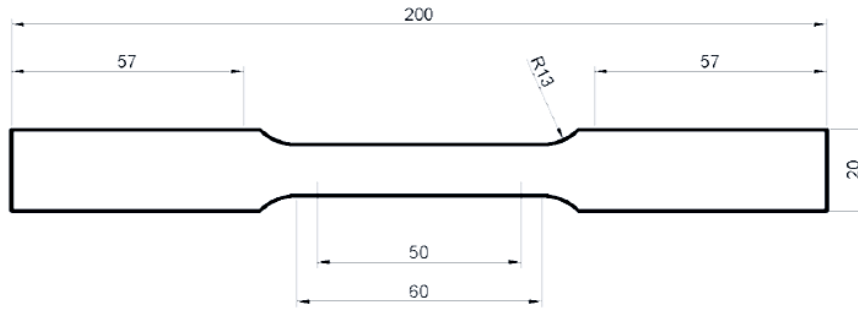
Engineering Drawing By (Auto CAD) for the Designed Tensile Test Specimen
